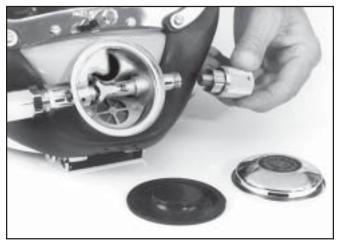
Screw the regulator adjustment knob out for removal.
